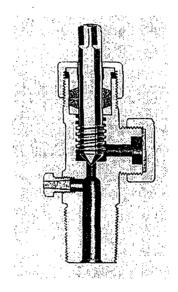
One Typical Style of a Cylinder Valve (Other Designs May Also be in Use)
